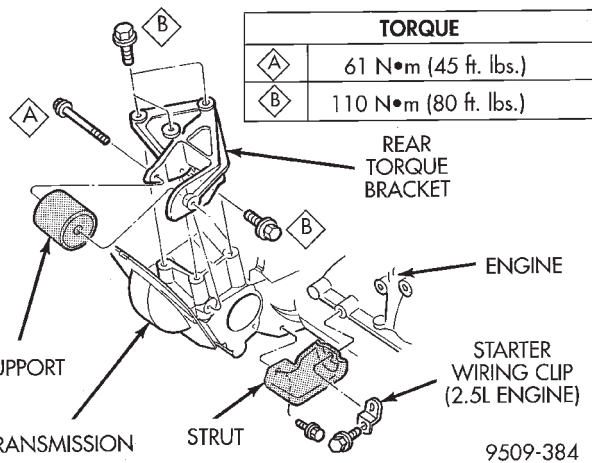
Engine Mounting—Rear 2.4 and 2.5L
